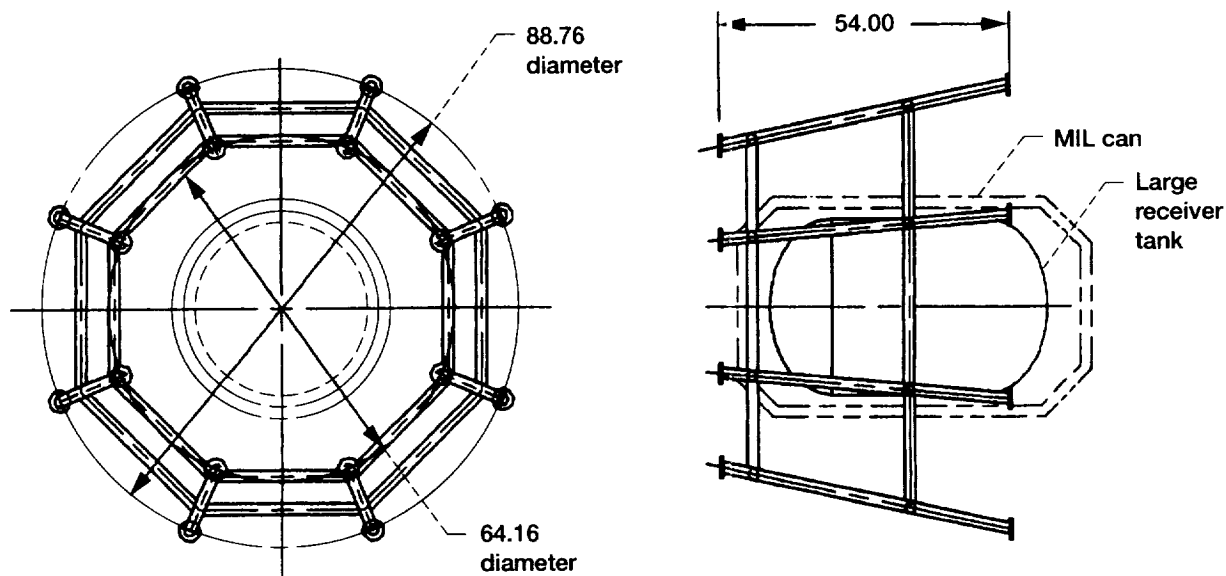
Large receiver tank module. Dimensions are in inches.
